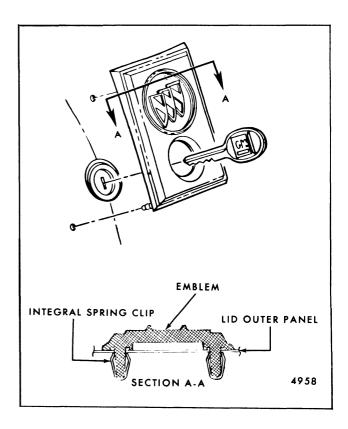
Typical Fixed Emblem - Integral Clip Retained
